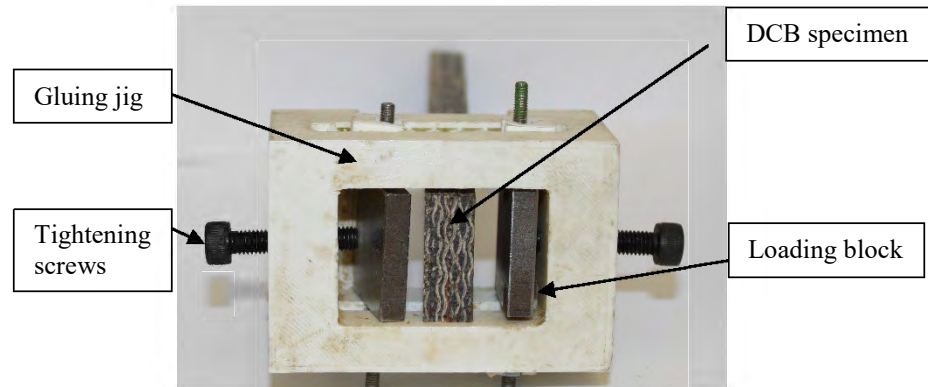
Photograph of DCB jig used to glue the loading blocks
